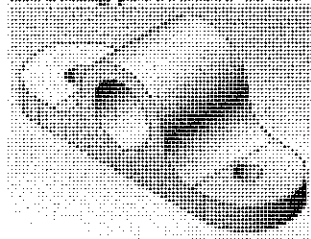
Control group bearing block for 2-D and 3-D CAD geometry.
